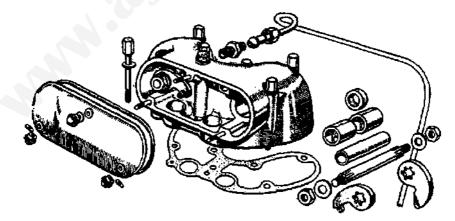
ARRANGEMENT OF ROCKER-BOX ASSEMBLY.
